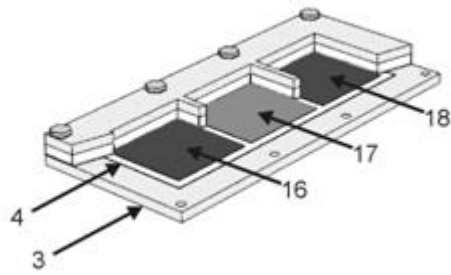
Isometric view of a partial section of the assembled device in open configuration.
